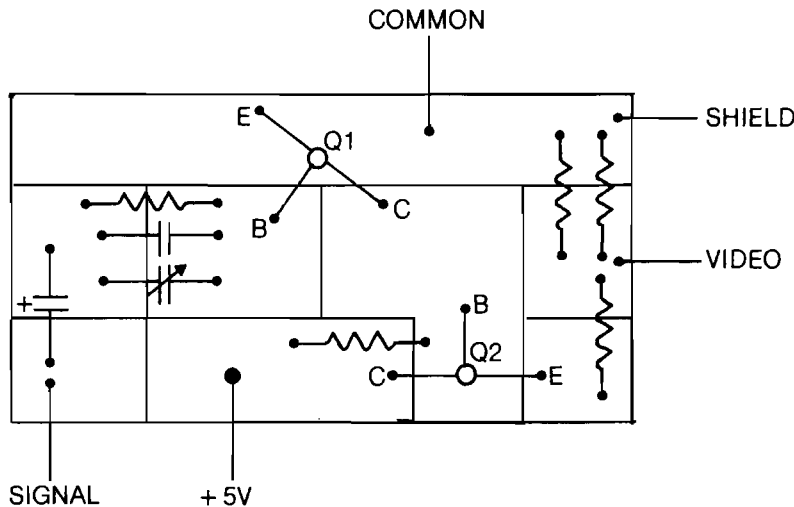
Parts layout for the amplifier board. Each part is soldered into place in the approximate location sketched.
